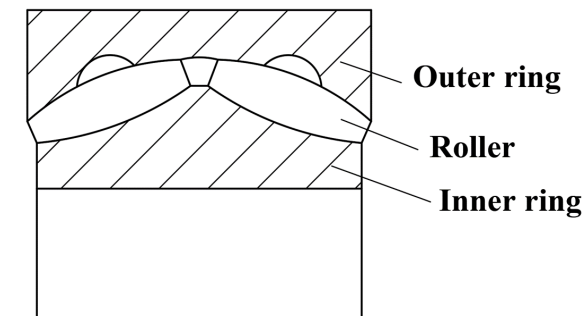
Full roller linear-contact self-aligning bearing without holder CN109737138A.
